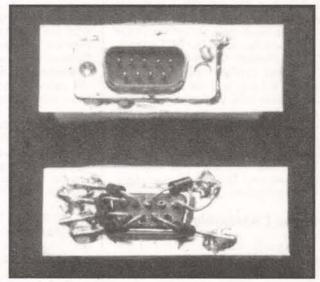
CONNECTORS SOLDERED TO END PLATES. TOP IS P1, WHILE BOTTOM IS REAR VIEW OF J1, SHOWING PLACEMENT OF DIODES.
